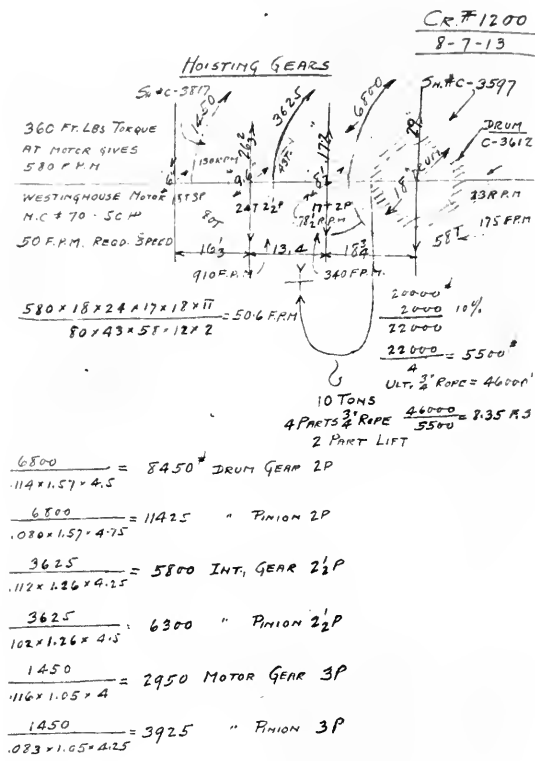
Computation Sheet for Hoisting Gears—kept for Reference Purposes
